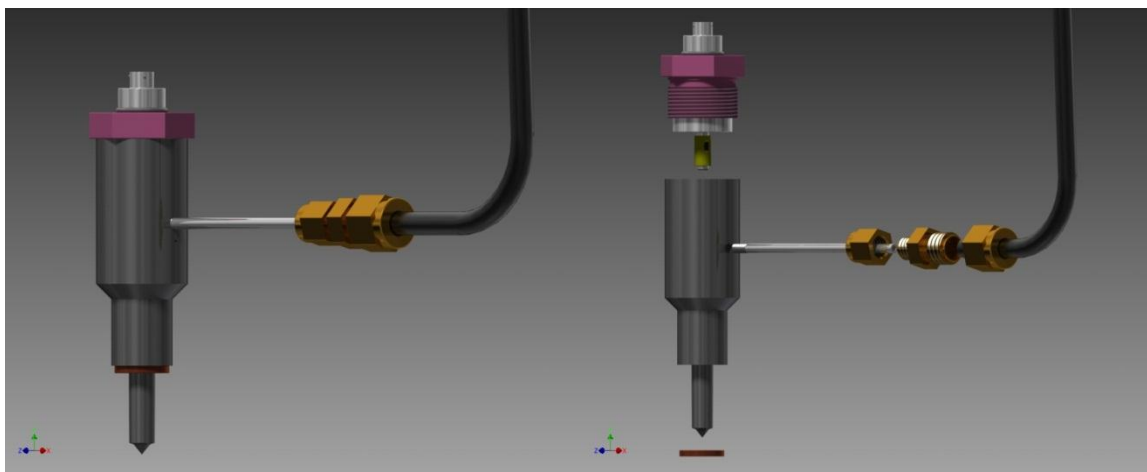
Residual Gas Injector solid modeled a. assembled view and b. exploded view
